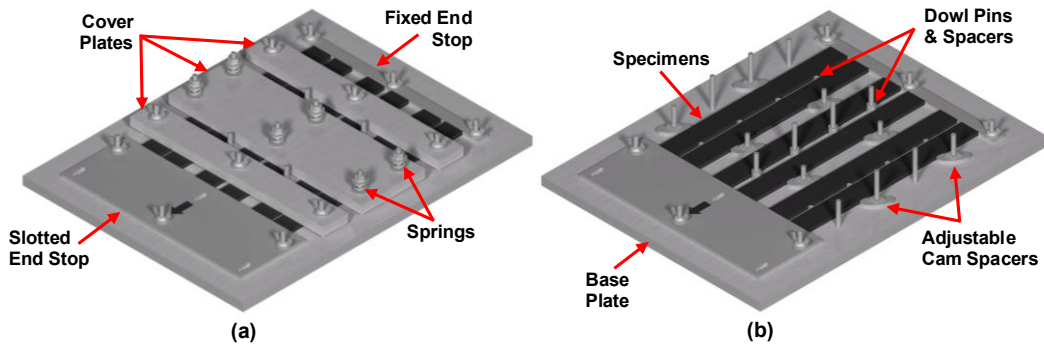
Multi-purpose bonding jig (a) with cover plates and (b) without cover plates
